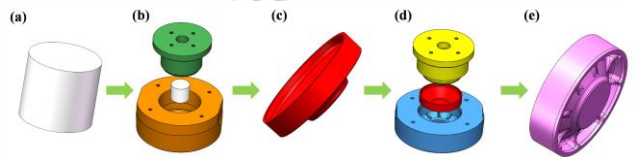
Process flow for the forging of aluminum alloy wheels: (a)billet, (b)pre-forging, (c)pre-forged component, (d)final forging, (e)final-forged component
